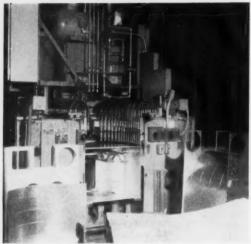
Multi-point welder which projection welds the front and back of the dryer frame to the sides.
